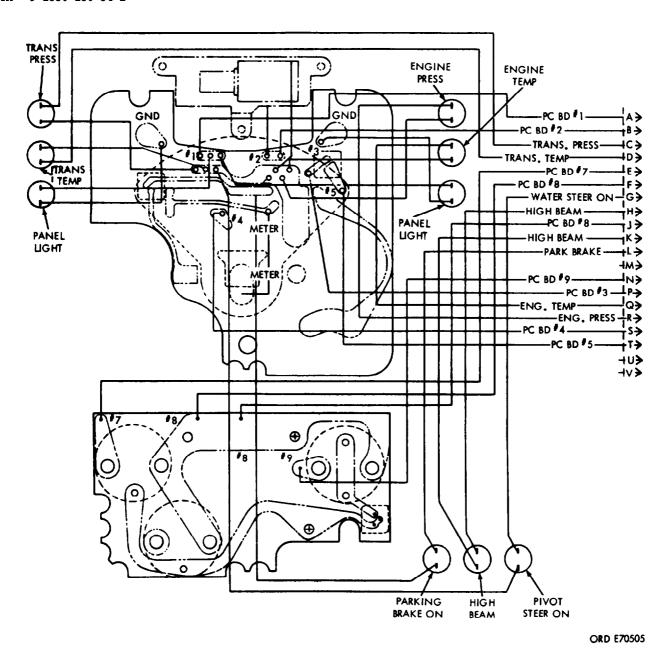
Driver's indicator panel instrument cluster assembly wiring diagram.
